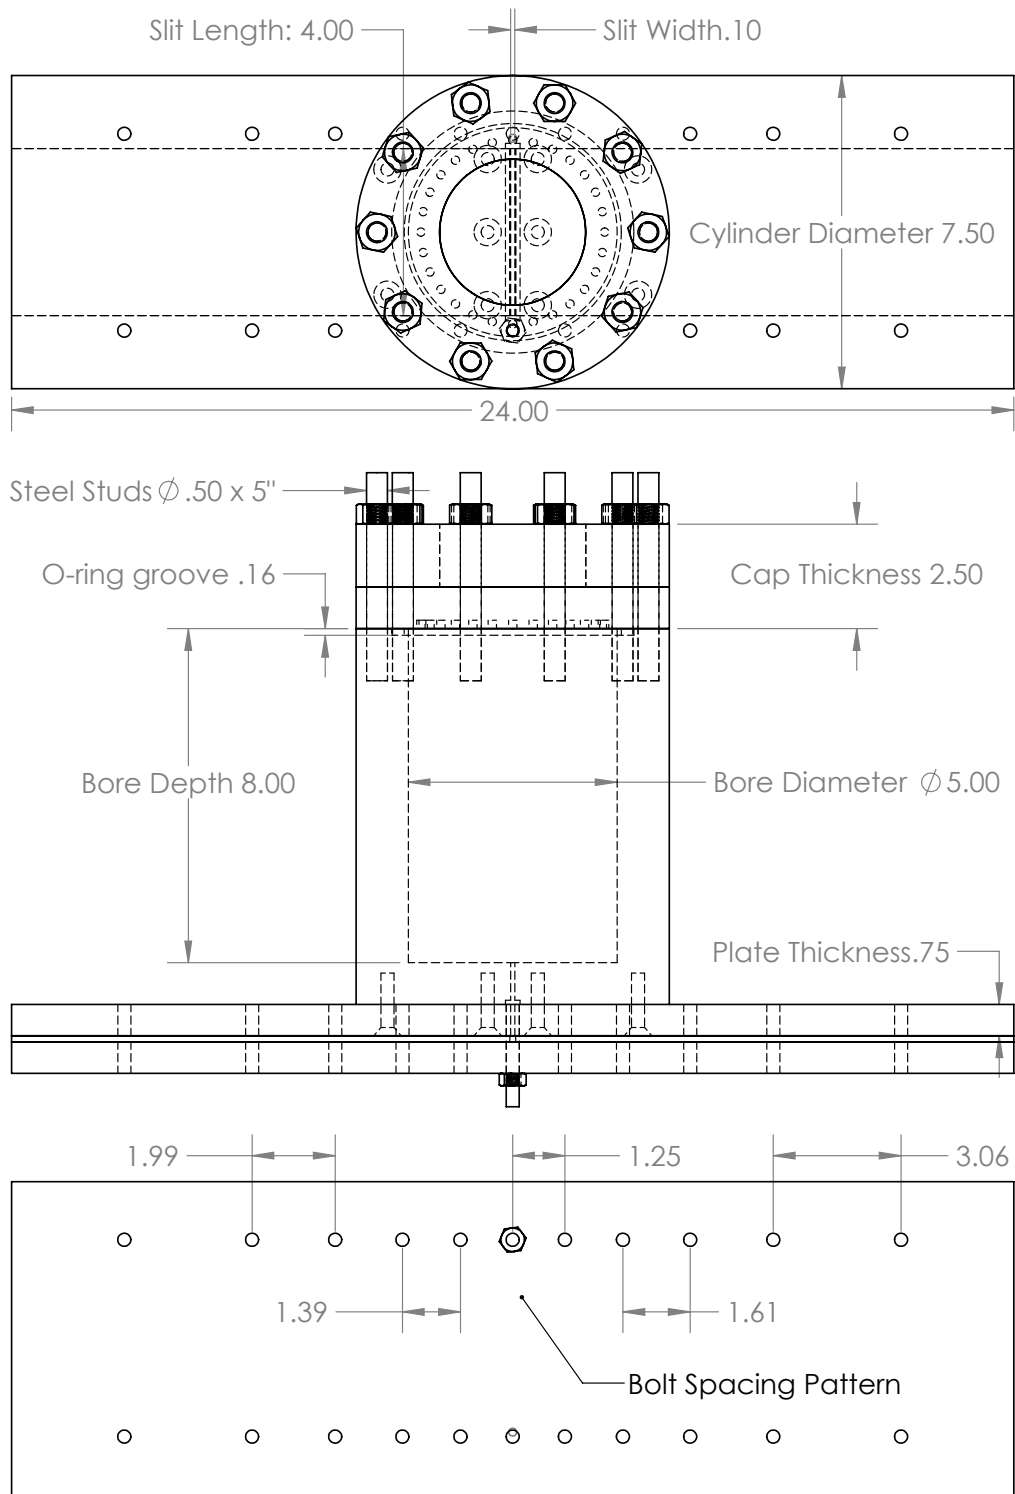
CAD sketch of the vessel body with dimensions in inches.
